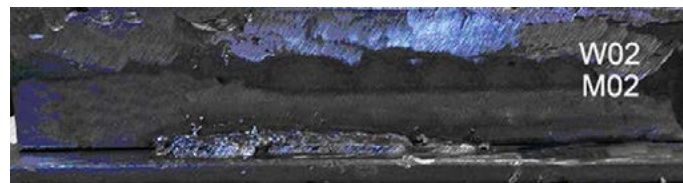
T-joint with the fillet weld (FW) on the side welded using a magnetised electrode
